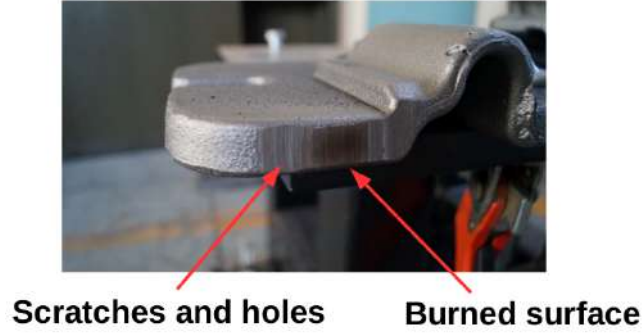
T1 experiment results: workpiece surface after burr removal using a constant feed rate approach.
